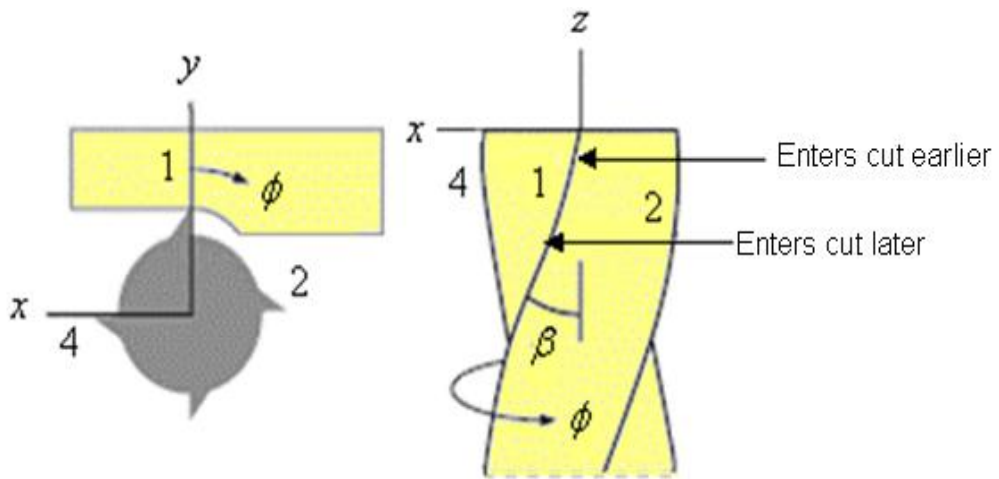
Delay cause by the helical end mill geometry on the cutting edge.
